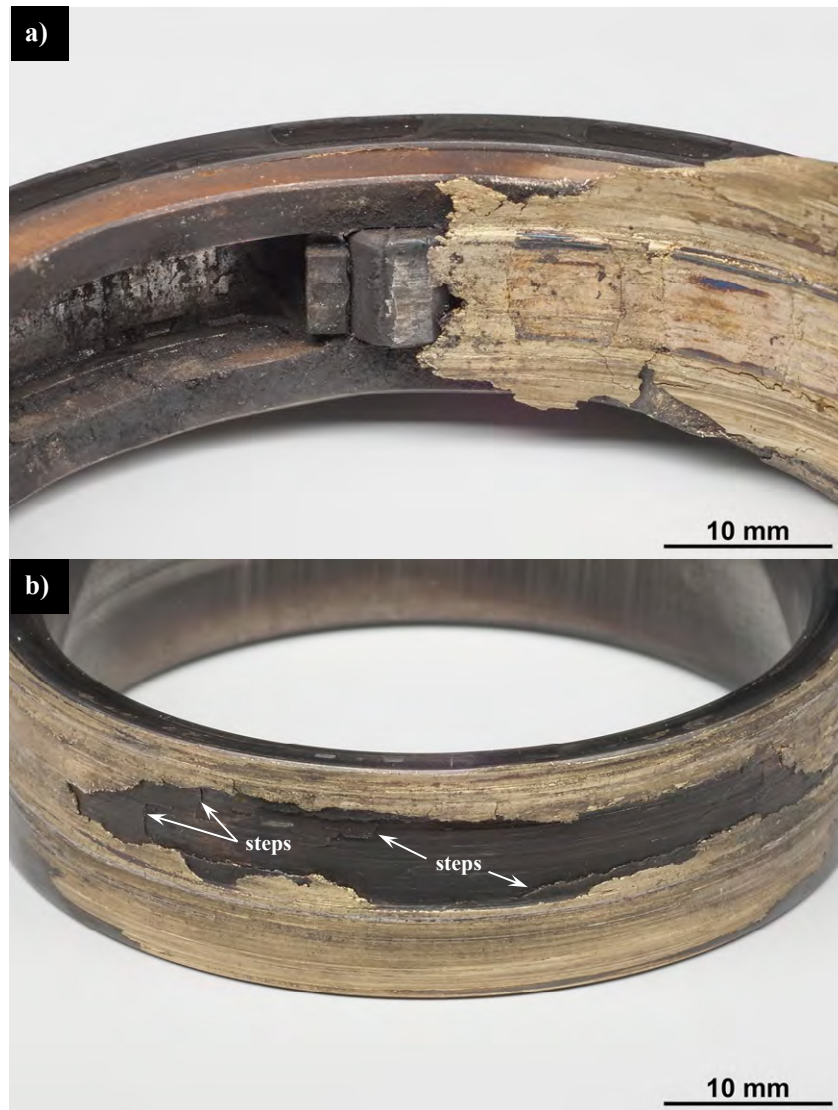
Photographs of the a) outer ring with (smeared) cage and rollers and b) inner ring with smeared cage
